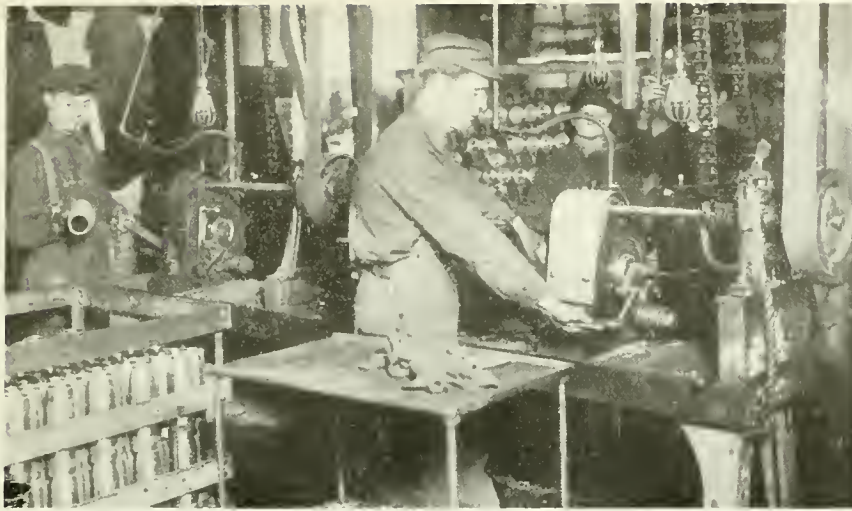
"LYMBURNER" DOUBLE END CRIMPING MACHINES ROUNDING-OFF CORNERS OF SHELL BASE AND CUTTING SMALL GROOVE JUST BELOW NOSE.
